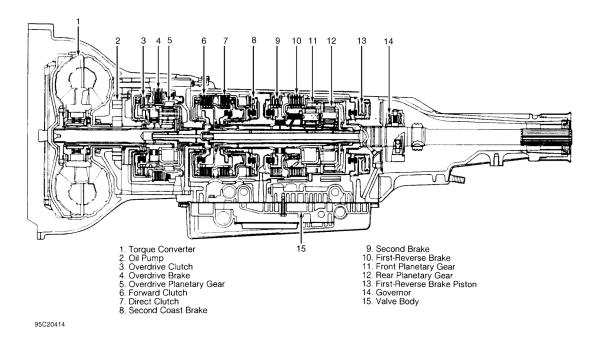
Identifying Transmission Component Locations Courtesy of ISUZU MOTOR CO.
